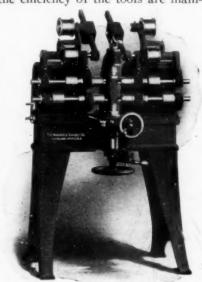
FIG. E. WARNER & SWASEY 4-SPINDLE VALVE MILLING MACHINE.
